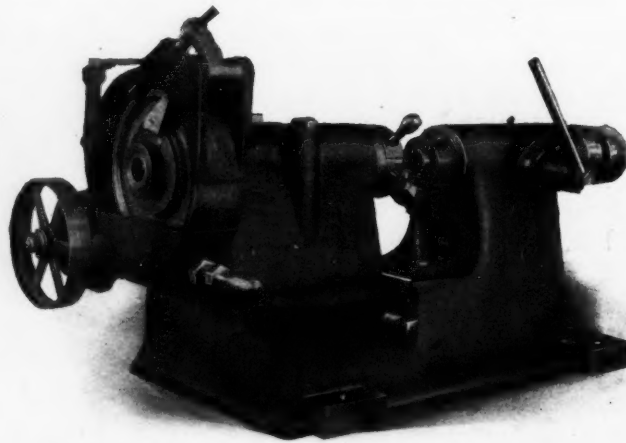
Partial End View of Machine illustrated in Fig. 1, showing Arrangement of Work-spindle Drive
